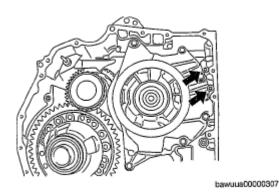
Identifying Transaxle Case Gaskets Courtesy of MAZDA MOTORS CORP.
